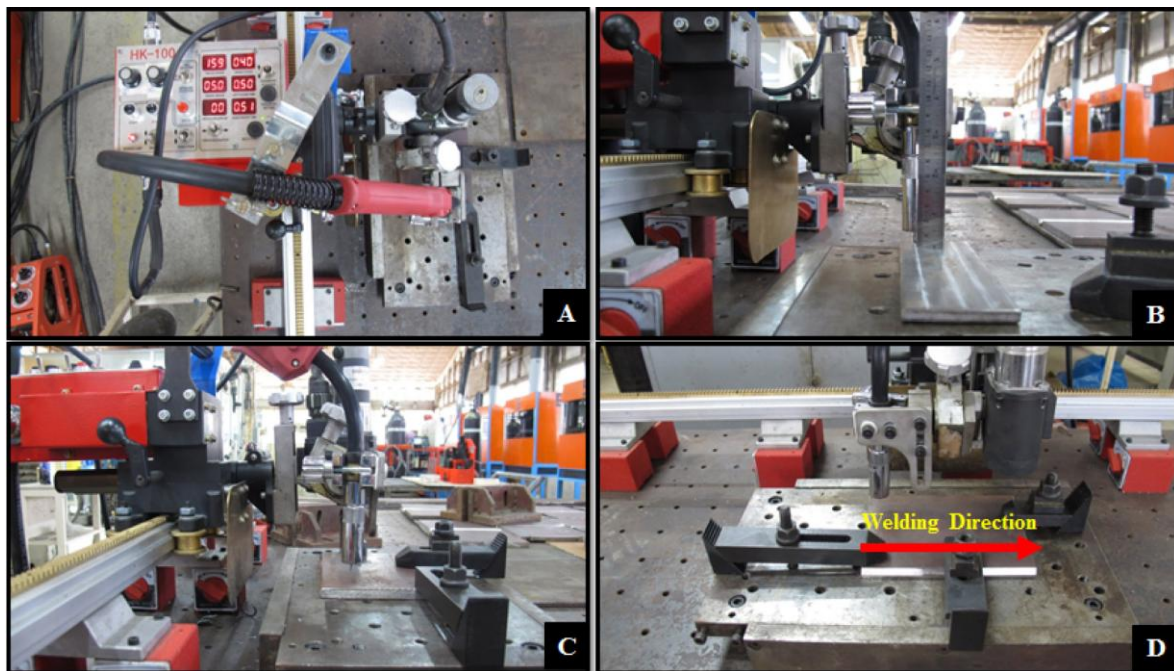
Shows the welding constant set up of mechanize welding machine
